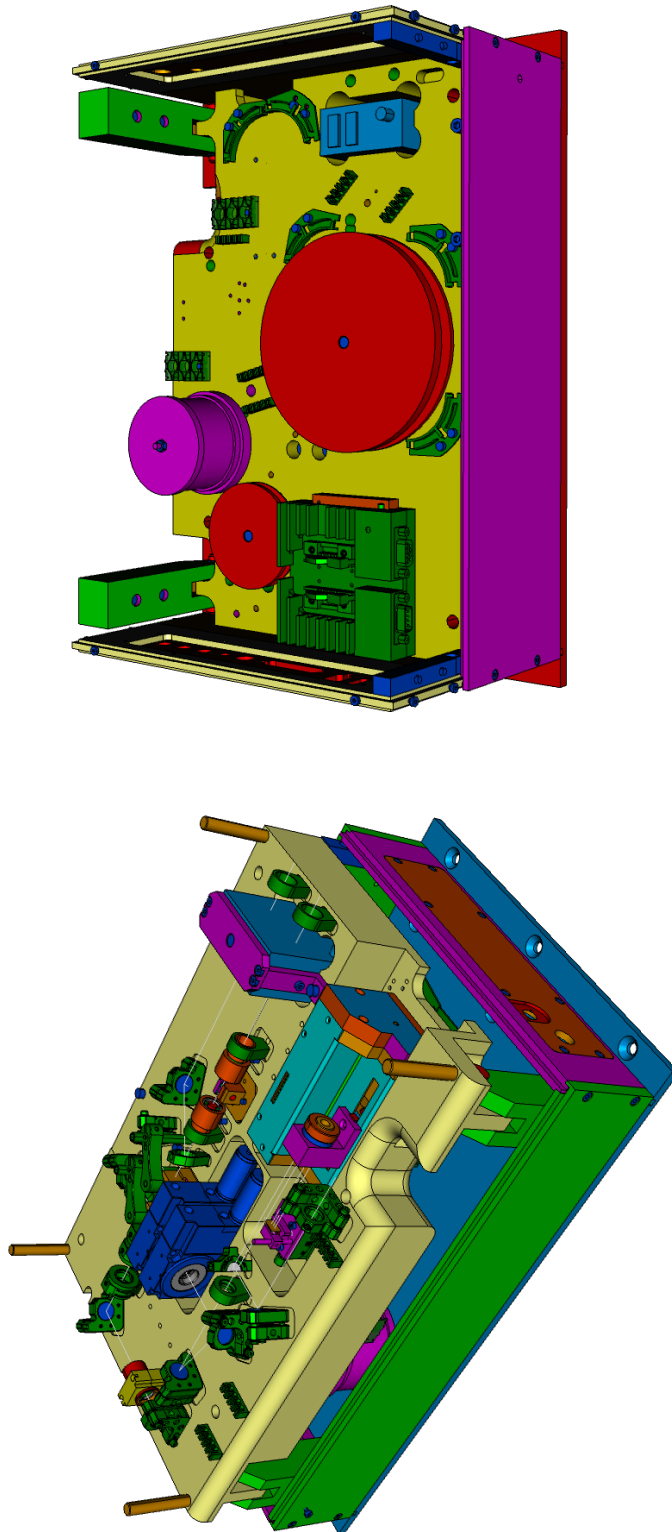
Technical design drawing: side view of the latest fibre-link box (version 3.0), with parts of the chassis removed (courtesy of K. Jähnke).
